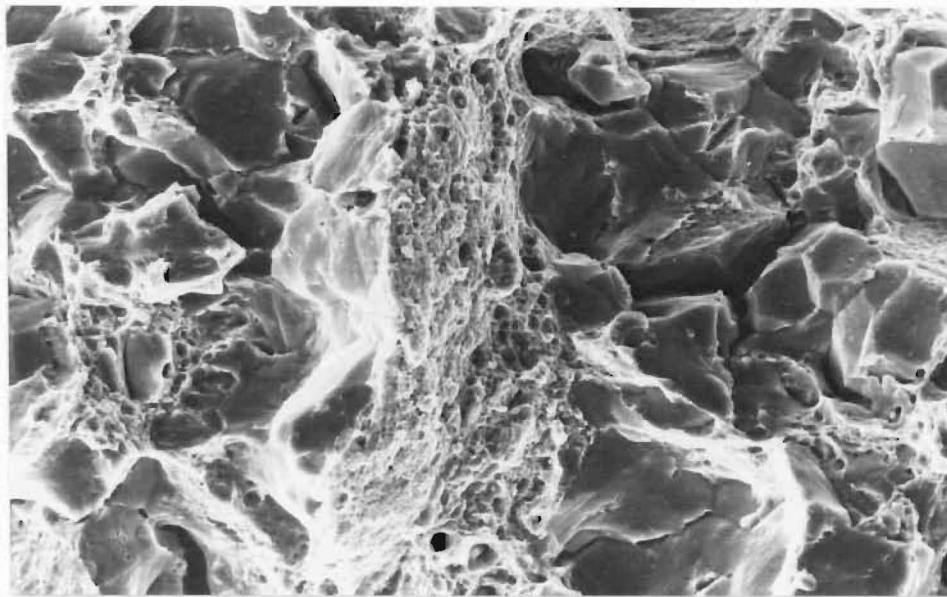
Typical area of rapid fracture region in the specimen fractured in air, showing a mixture of ductile fracture with intergranular cracking and quasi-cleavage, at 800 x.
